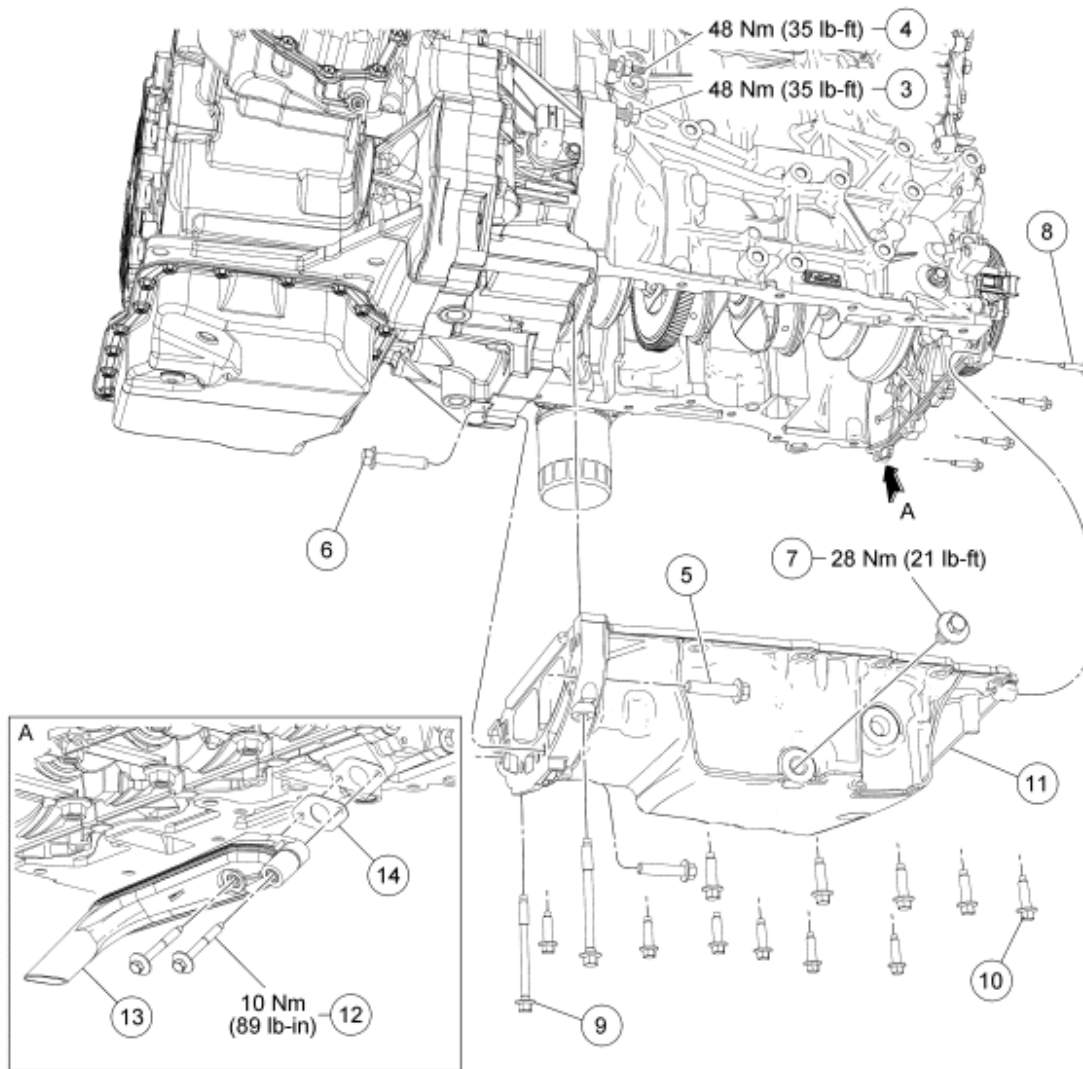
Exploded View Of Transmission Bolts For Oil Pan Removal With Torque Specifications
